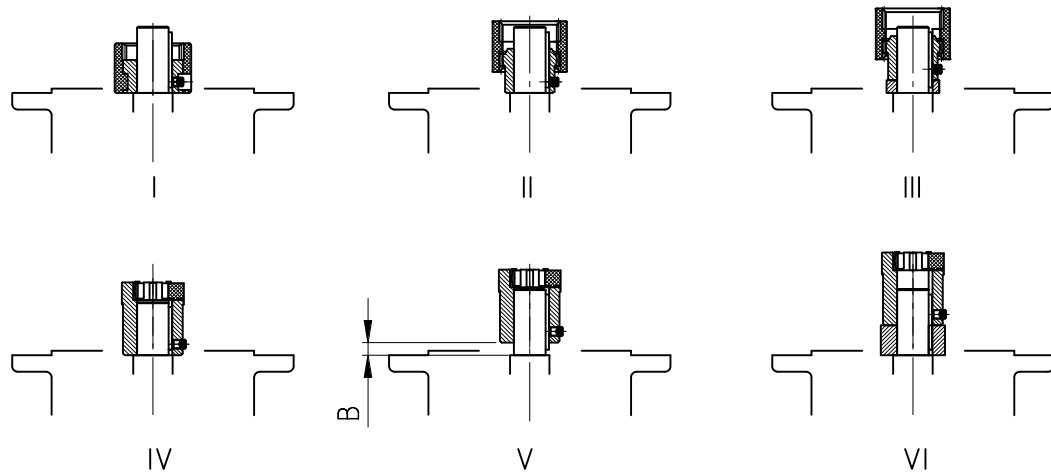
Fitting the coupling onto the motor shaft - various types of coupling
